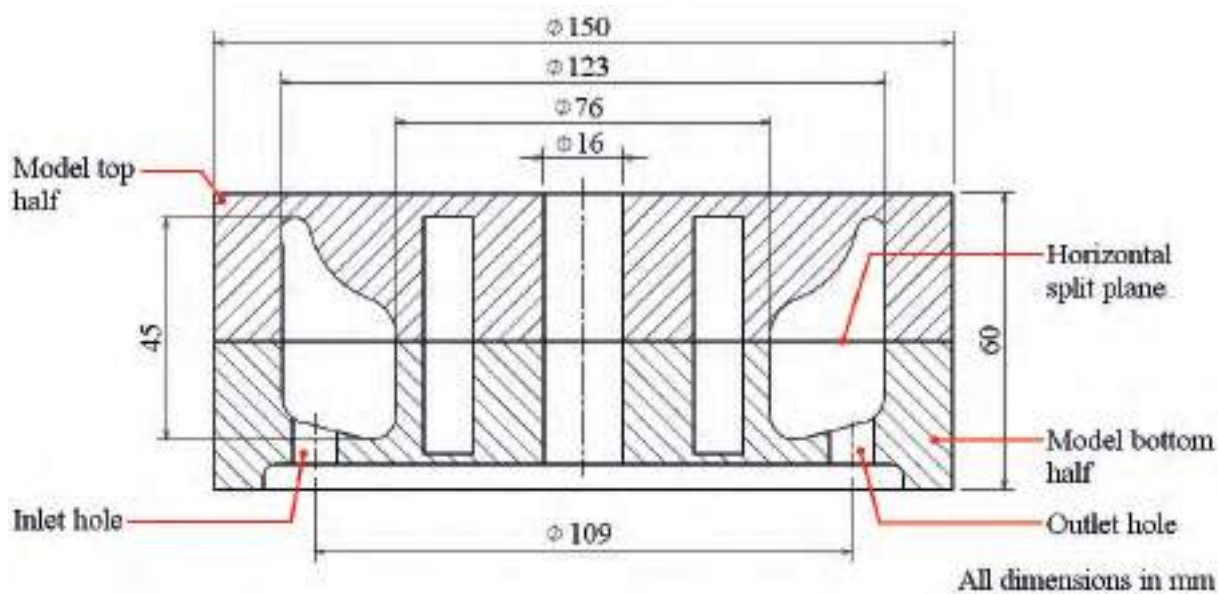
Cross-sectional view of gallery model with major dimensions
